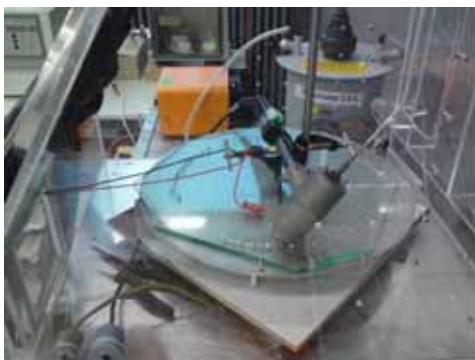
Manufacture of solder wire used for prototype edge sealing from activated solder ingots by means of extrusion of liquid metal in an inert gas atmosphere
